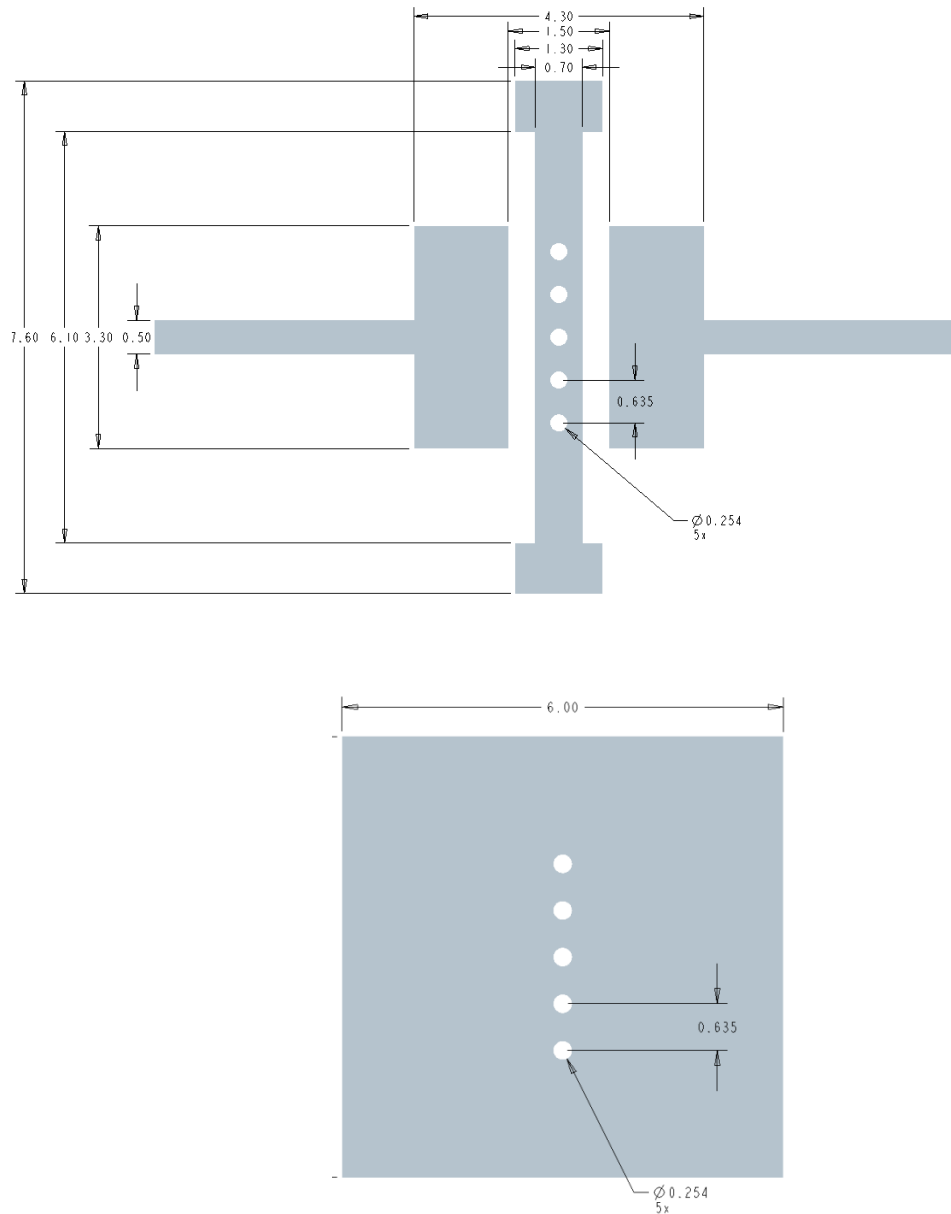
Recommended footprint for XLamp ML package on FR-4 PCB (top and bottom)
